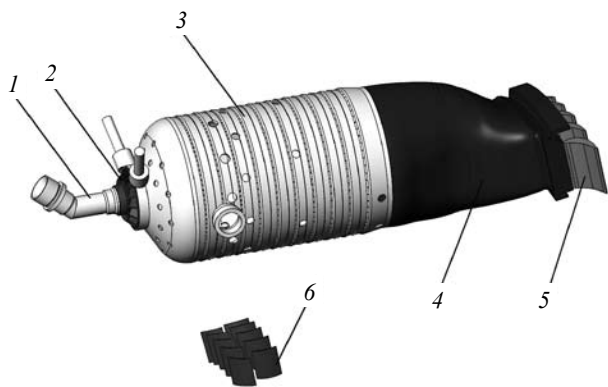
Assembling of the combustion chamber flame tube and related elements
